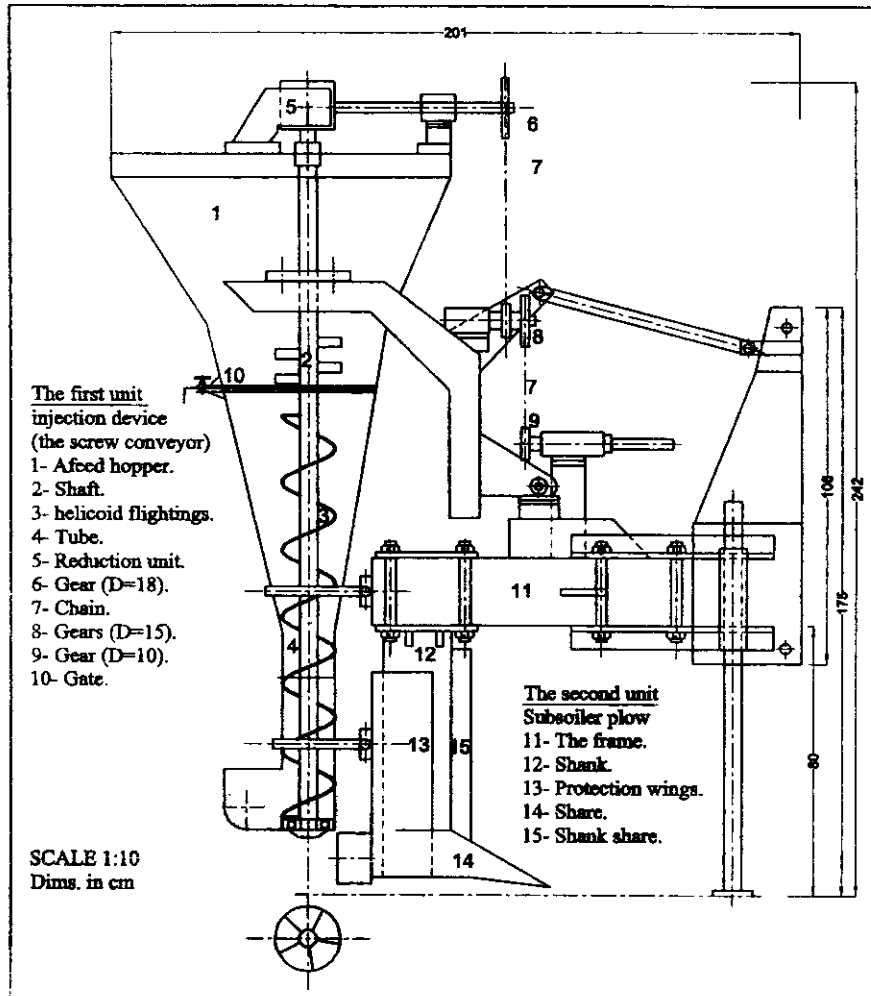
a: A schematic diagram number 2 of the injection machine (a screw conveyor and subsoiler plow), of agricultural residues and solid materials in the soil constricted by Dr- Wagdy El-Haddad. This machine has a good performance with the sand injection and chopping straw injection. Field experiments were conducted on this machine
